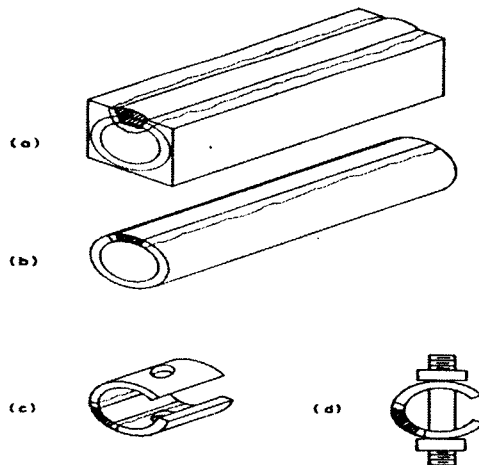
Successive steps in the making of C-rings specimens. (a) bar with weld filled groove, (b) tube machined from square bar stock, (c) portion of the tube notched in the heat affected zone with hole drilled through ring and back removed, and (d) finished C-ring with loading bolt in place
